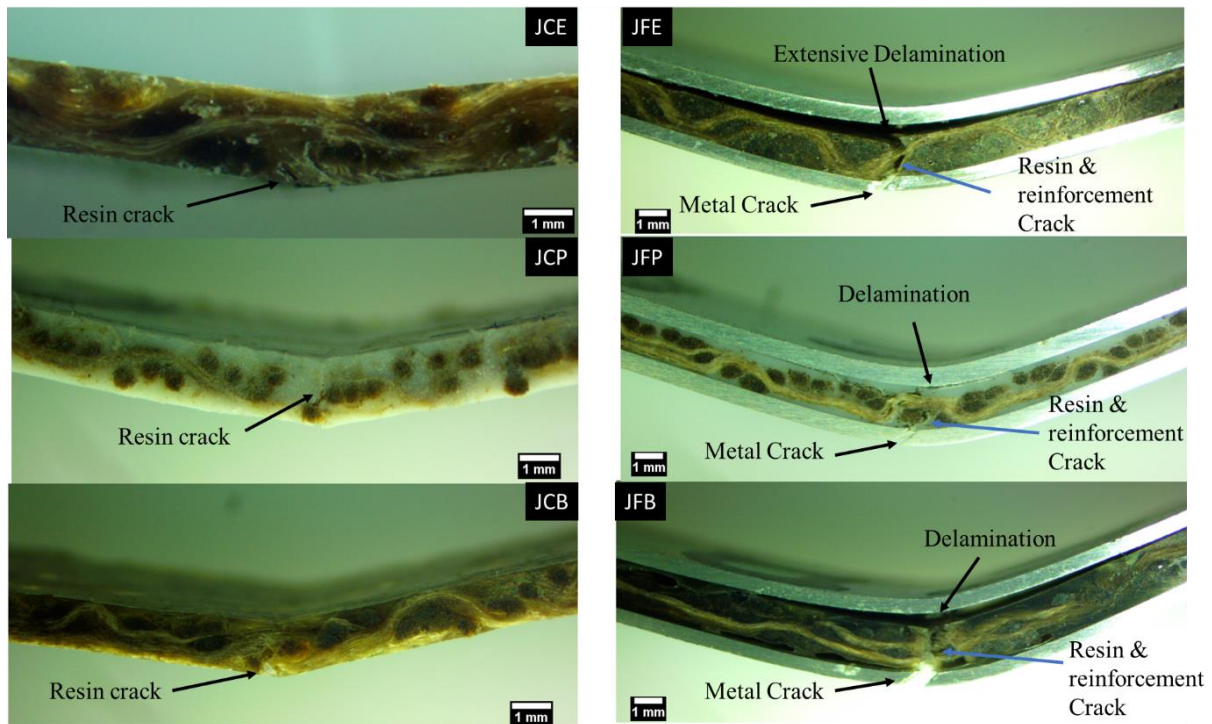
The cross-section of fractured samples after flexural test of 3D jute composite and FMLs
